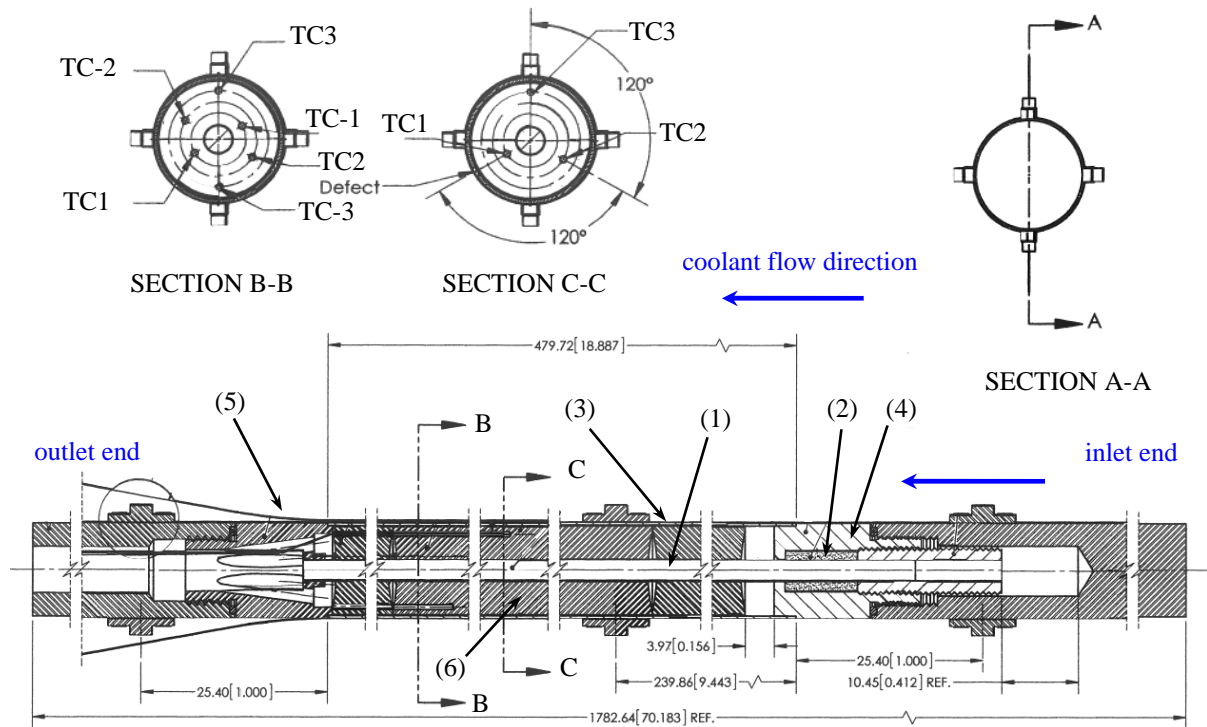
Fuel element simulator assembly drawing [84]. The key parts are (1) the iridium bar (heater), (2) the silver powder packing section for electrical conduction and expansion allowance, (3) the sheath, (4) the upstream end cap, (5) the downstream end cap, and (6) pellet at location of the sheath defect.
